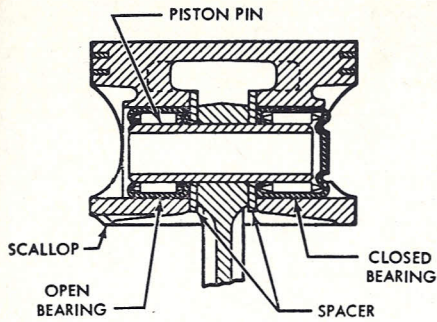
Cross-section view of power piston showing position of needle bearings and connecting rod spacers.
